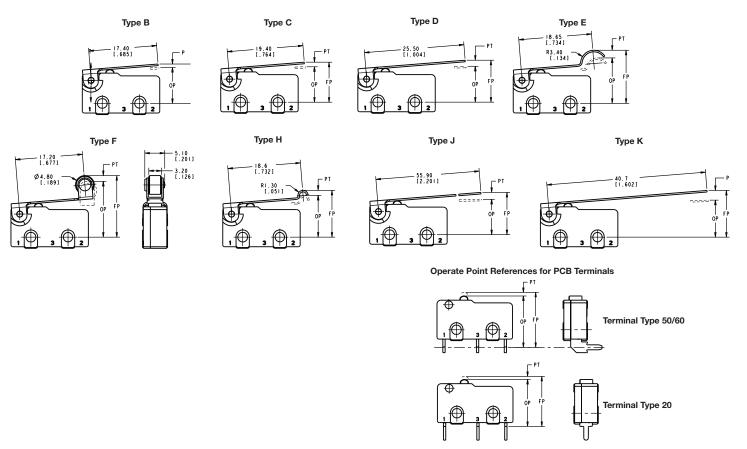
MICRO SWITCH ZM1 Series Mounting Dimensions - External Mount Actuator
